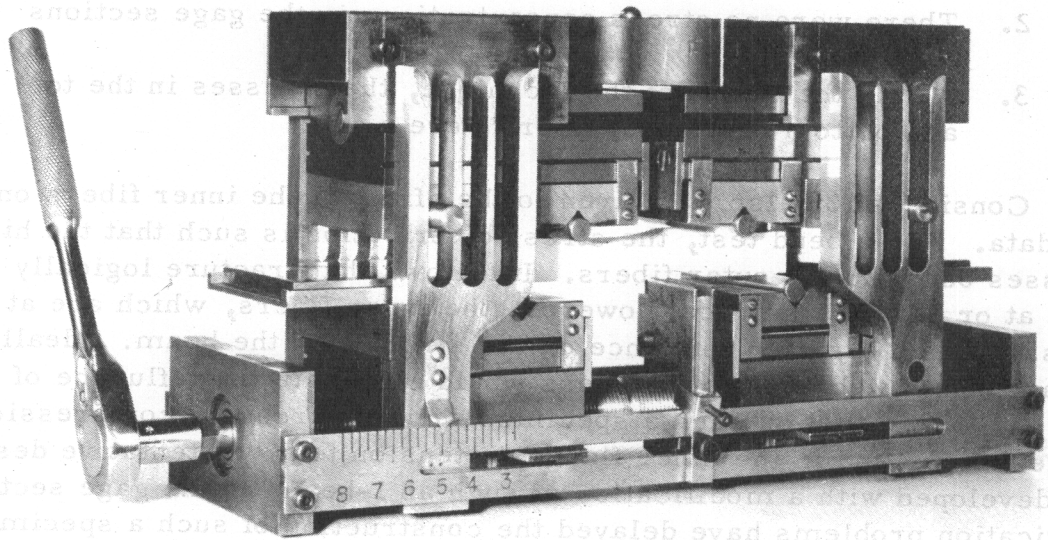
JIG FOR LOADING BEND-TEST SPECIMENS
